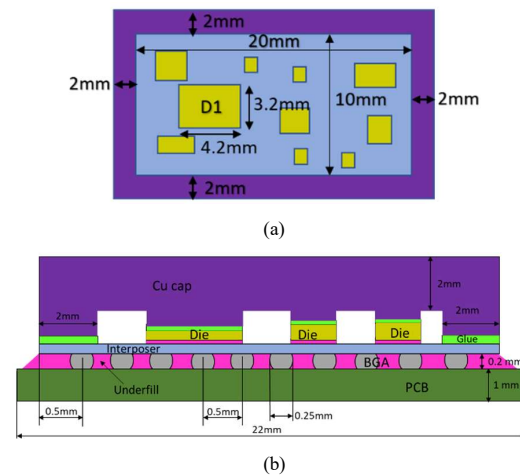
Schematic of a 2.5D TSI package with a metal cap (not to the scale). (a). Package layout (metal cap top cover is not shown) (b) Typical section view of TSI package with PCB and solder bumps
